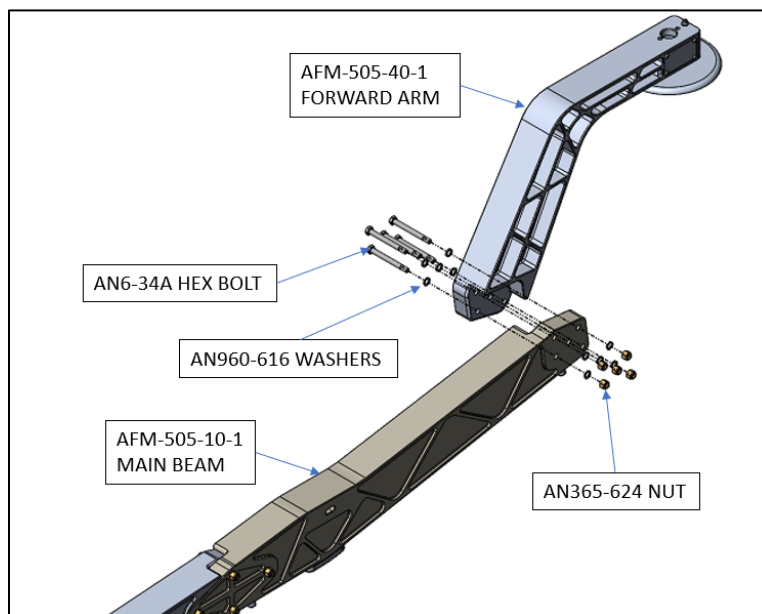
Installation of the Beam Assembly onto the AFM-505-40-1 Forward Arm Assembly.
